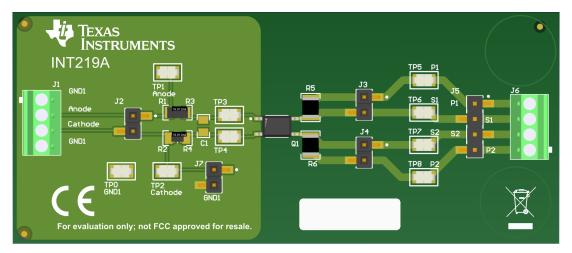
ISOM8610DFGEVM PCB 3D Diagram
